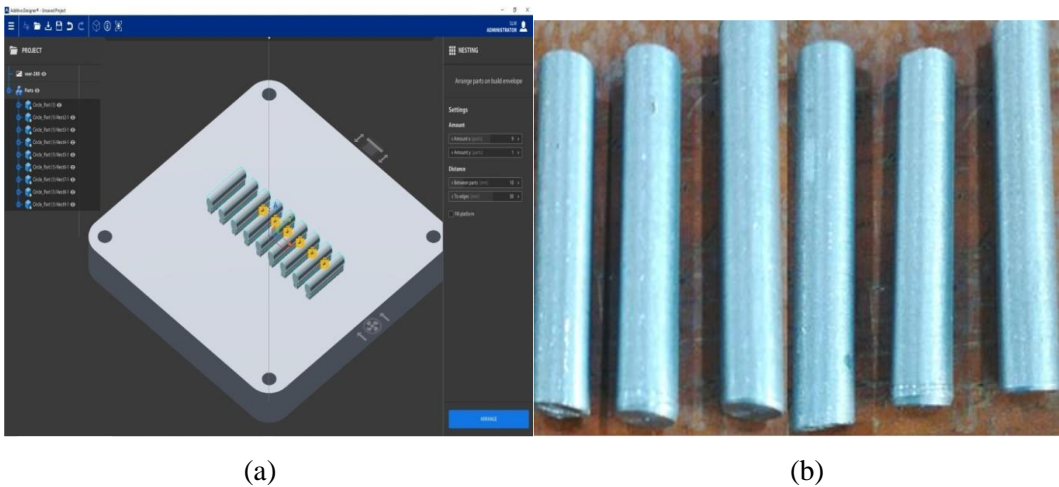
a) Specimens on SLM build platform samples and b) After manufactured and casting specimens.
